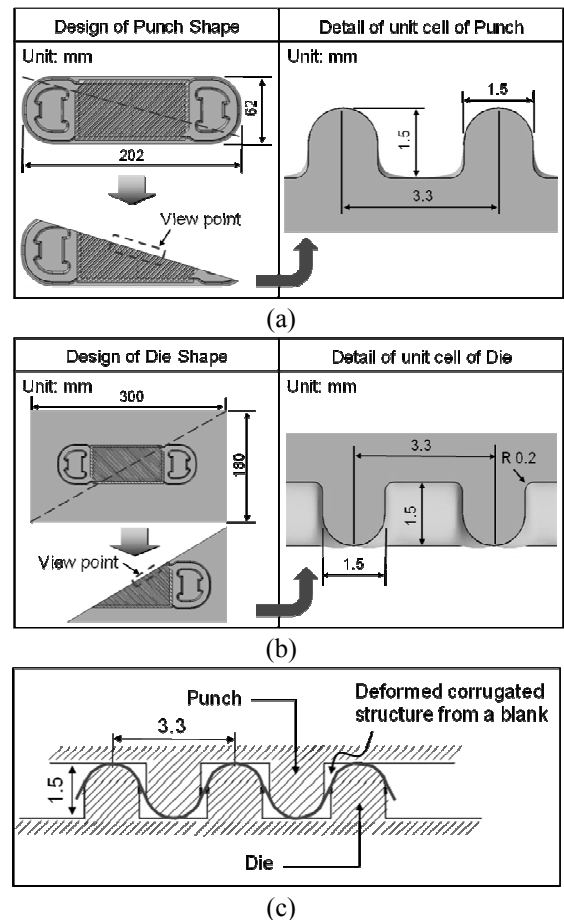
Details of shape and dimension of mold; (a) punch, (b) die, and (c) matched punch and die, deformed corrugated structure
